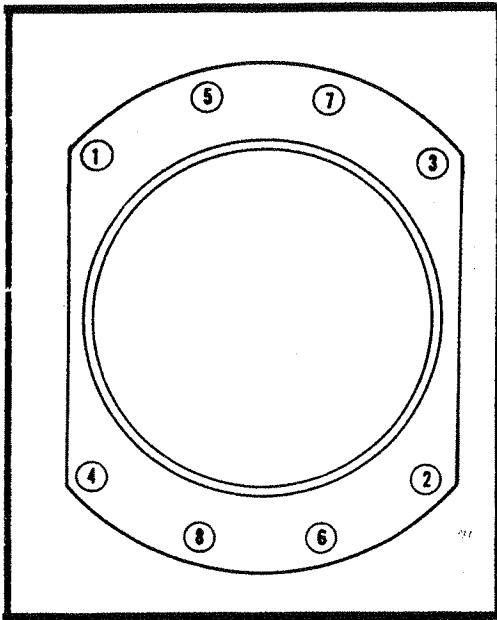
C. CYLINDER FLANGE TORQUE SEQUENCE FOR SINGLE CYLINDER INSTALLATION.
